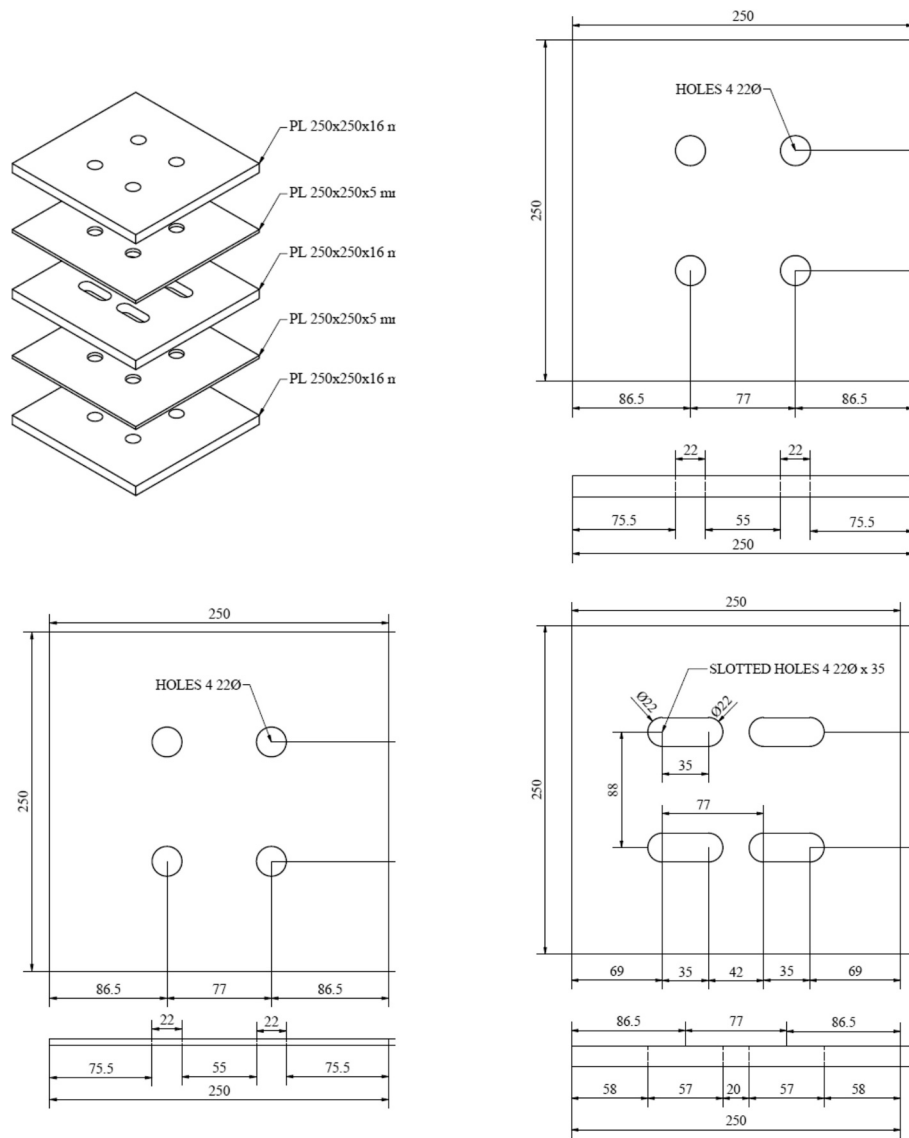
Layout of the plates used for bolt tightening tests (dimensions in mm).
